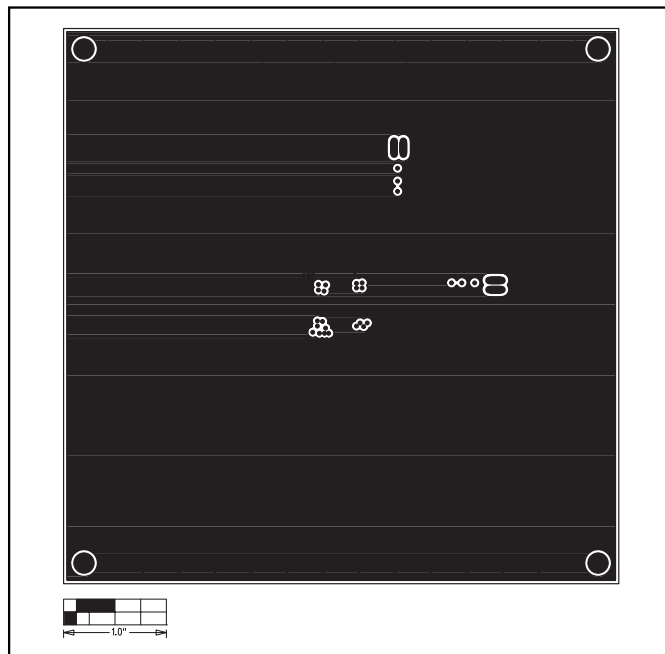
MAX9311 EV Kit PC Board Layout—Inner Layer 2 (GND)
